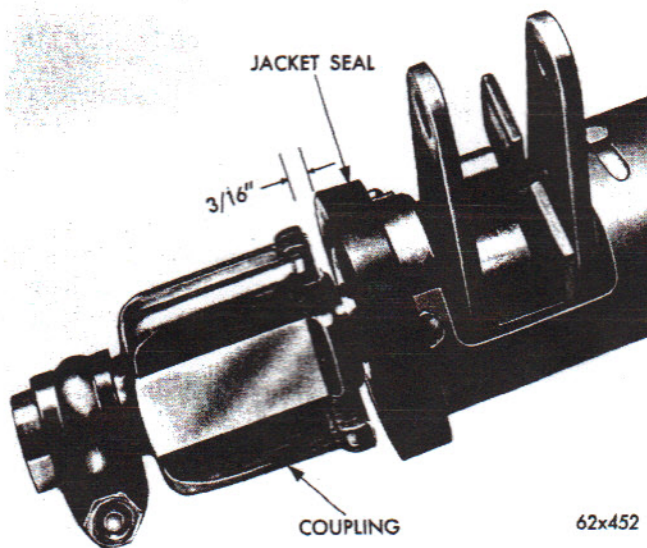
Positioning Steering Shaft Coupling (Power Steering and Standard Transmission)
